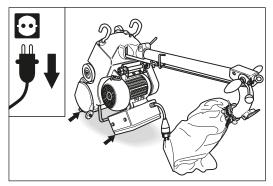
Place the machine carefully on the floor. Ensure that the machine is standing securely!
